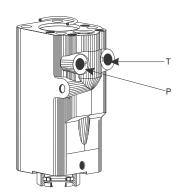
B Ports on Cylinder & Cylinder Head
